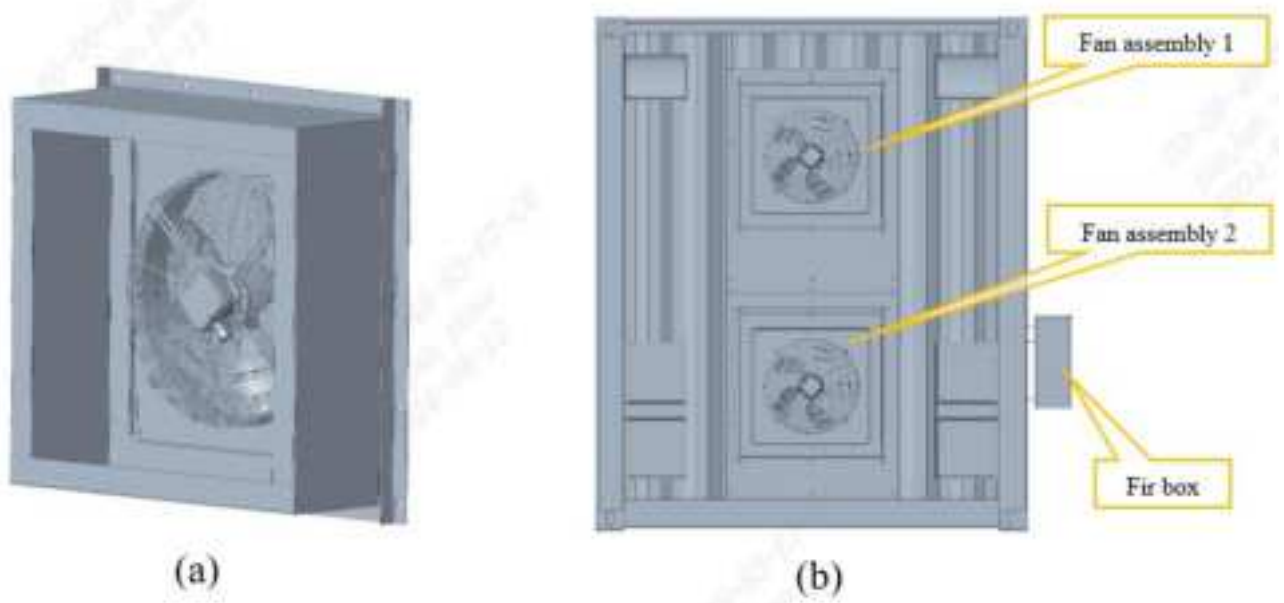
(a) Schematic diagram of fan assembly (b) Installation diagram of container fans
